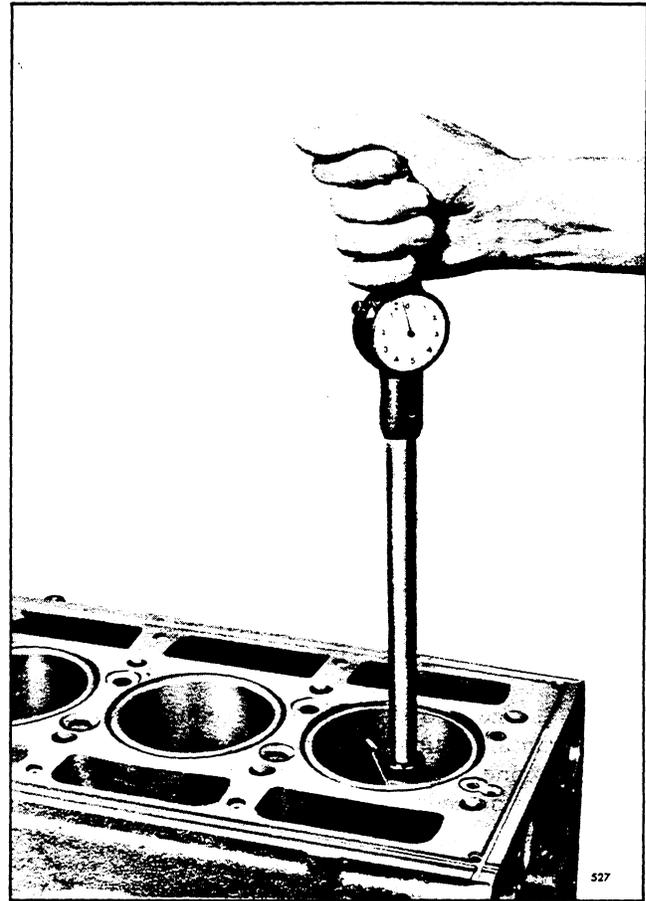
Checking Bore of Cylinder Block with Tool J 5347-01
